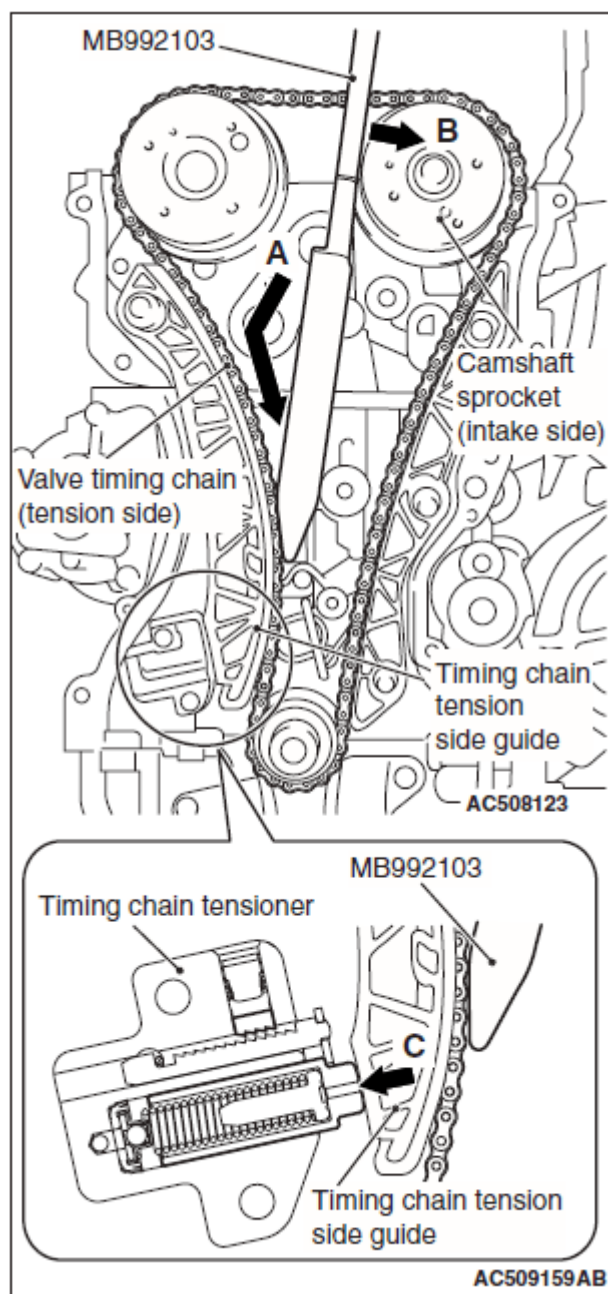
Removing Flat-Tipped Precision Screwdriver Unlocking Timing Chain Tensioner
